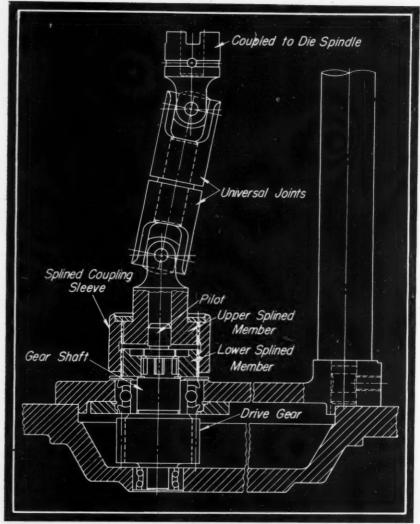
Design of splined coupling permits quick adjustment of die spindle relative to drive gear without the use of tools. Splined sleeve is lifted by hand, turned, and then dropped back into position shown
